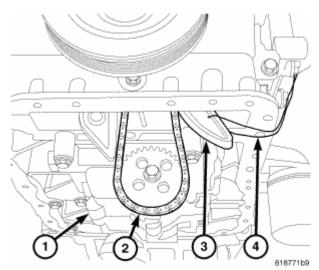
RELEASE TENSIONER Courtesy of CHRYSLER LLC
